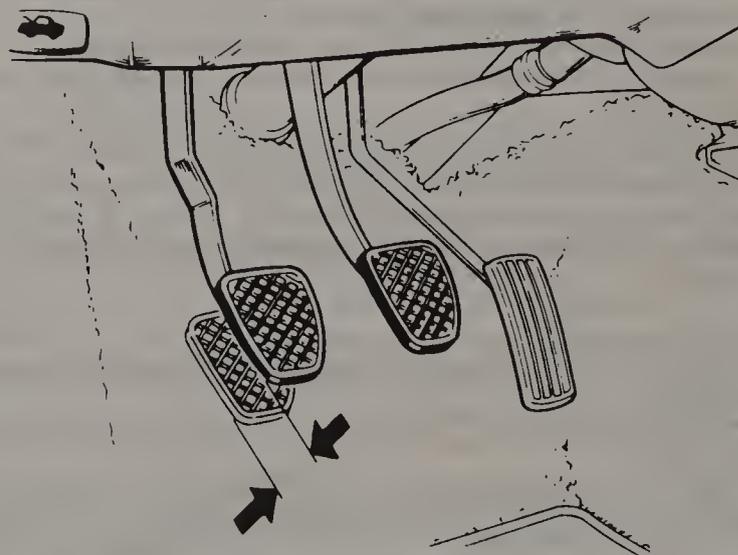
Checking clutch pedal freeplay (Sec 43)
